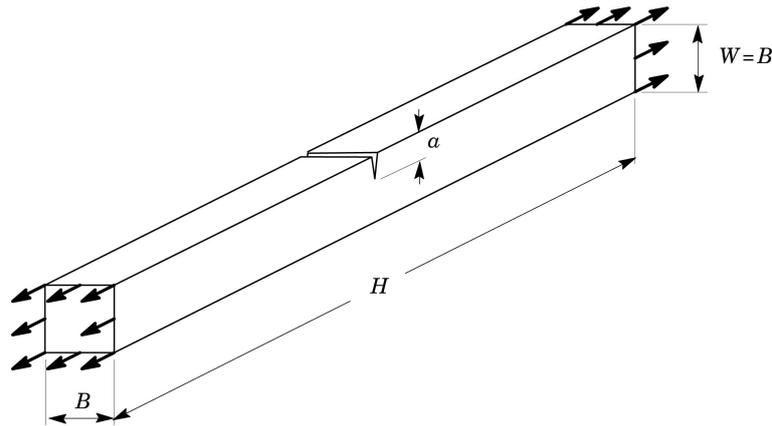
Geometry of tested clamped SE(T) specimens having $H/W = 10$ and $B \times B$ configuration with $a/W = 0.3$ and $a/W = 0.4$.
